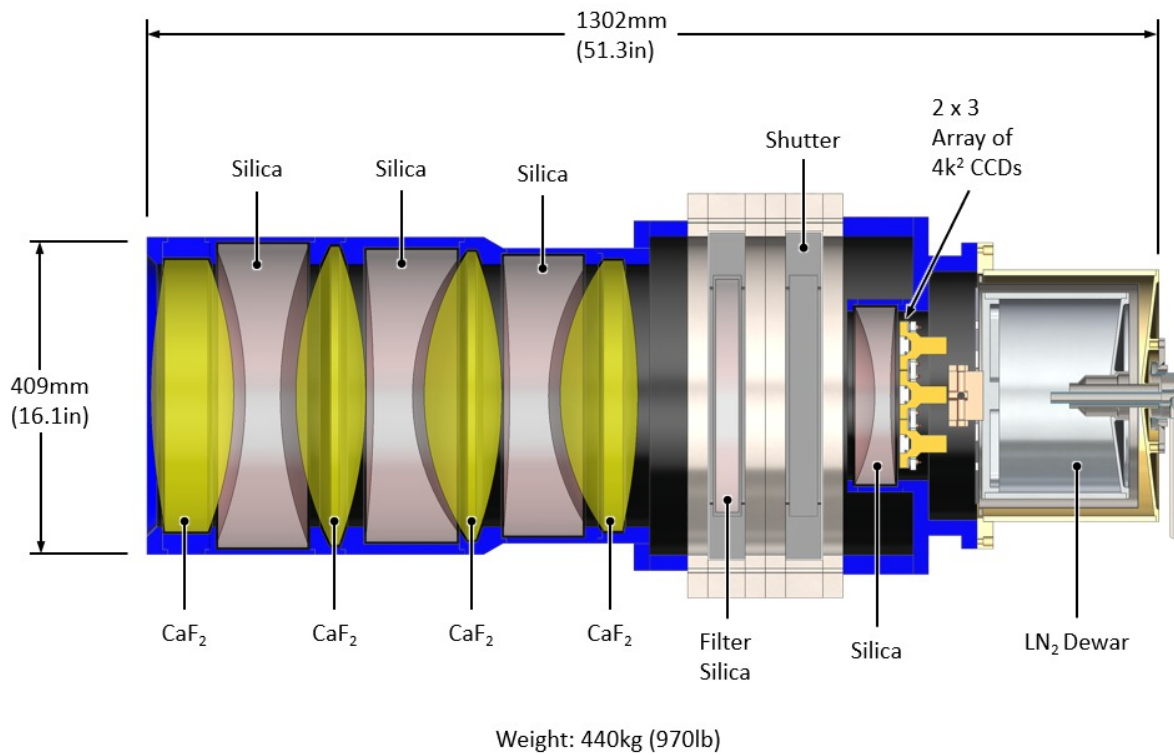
Section view of the blue camera showing the lens arrangement, cells, filter, shutter, CCD and its cryostat.
